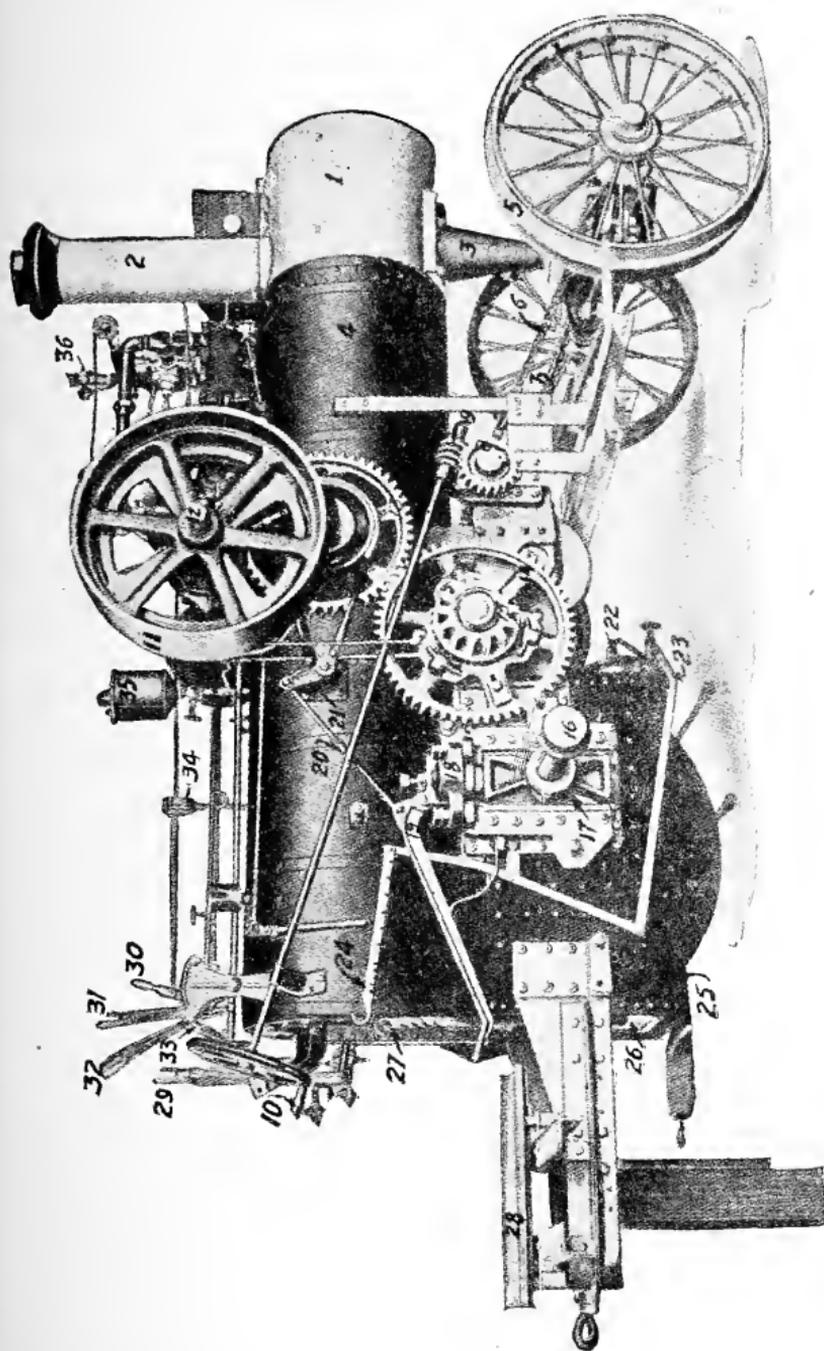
Traction Engine with Rear Wheels, Platform and Side Tanks Removed to Show Steering and Driving Mechanism
